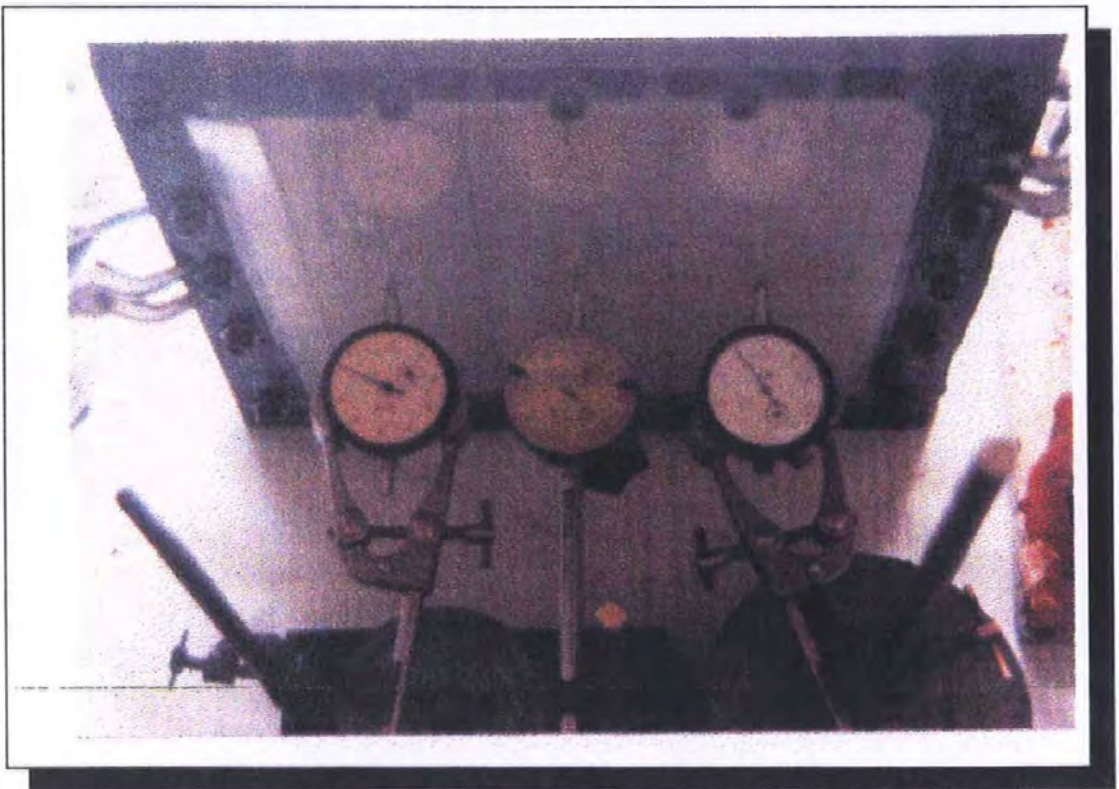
4 Dial Test Indicators Measuring Mould Deflection
